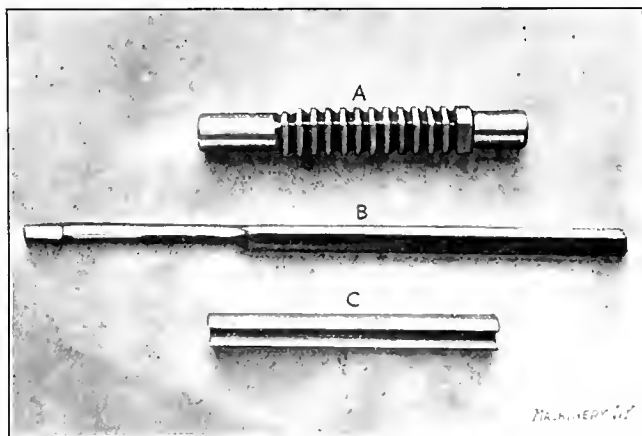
Broach, Cutter and Cutter Guide used in making Square Holes
